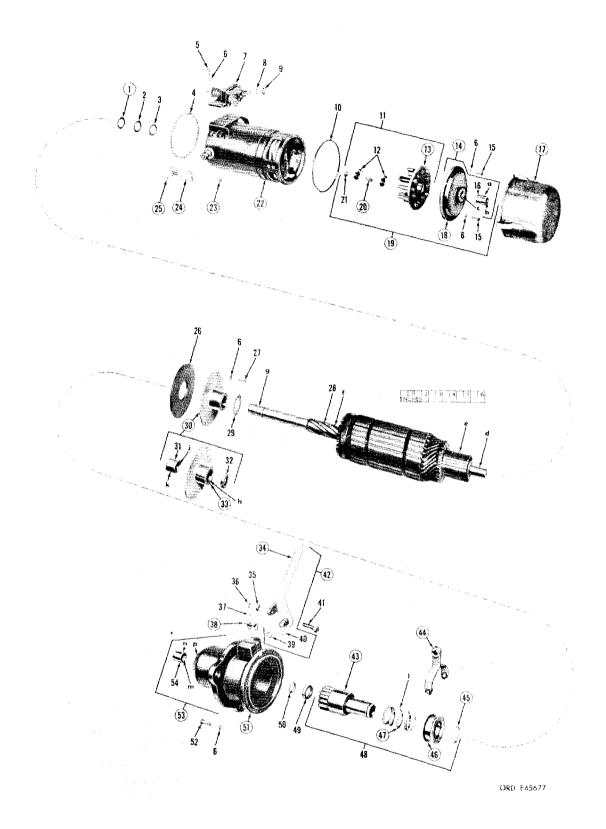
Engine Electrical Starter Assembly (2920-852-5483)-Exploded View
